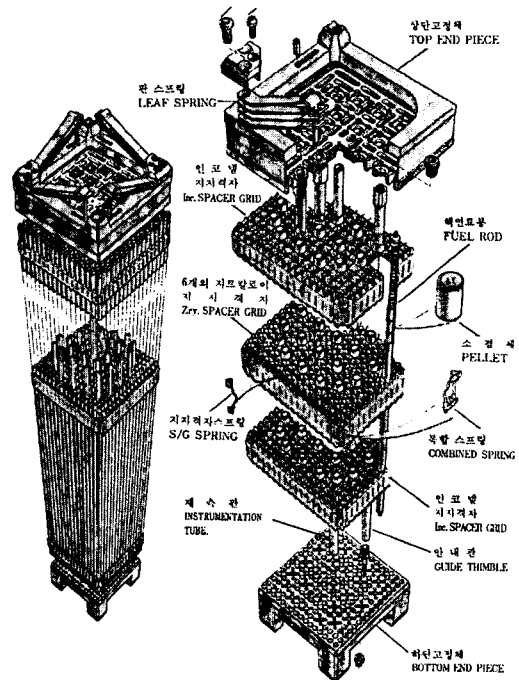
Fuel Assembly for Westinghouse-type Plant.
